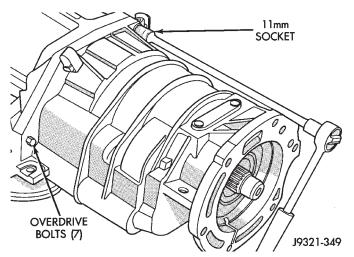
Removing/Installing Overdrive Unit Attaching Bolts
